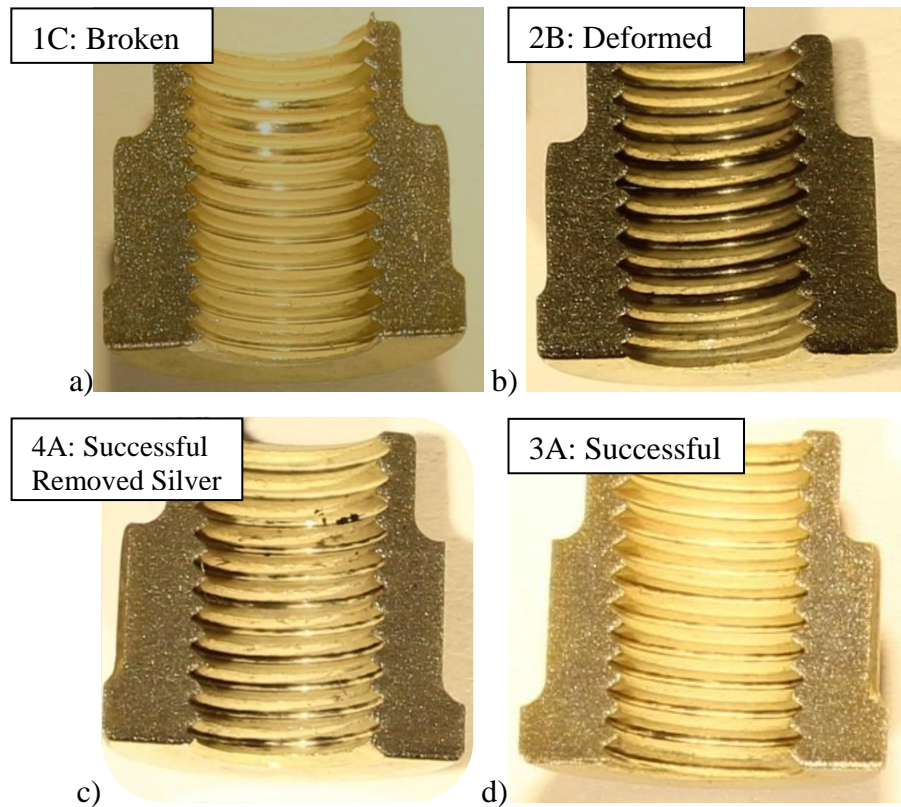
Coating Conditions: a) Broken Joint (Sample 1C), b) Deformed Joint (Sample 2B), c) Removed Silver (Sample 4A), d) Intact Coating (Sample 3A)
